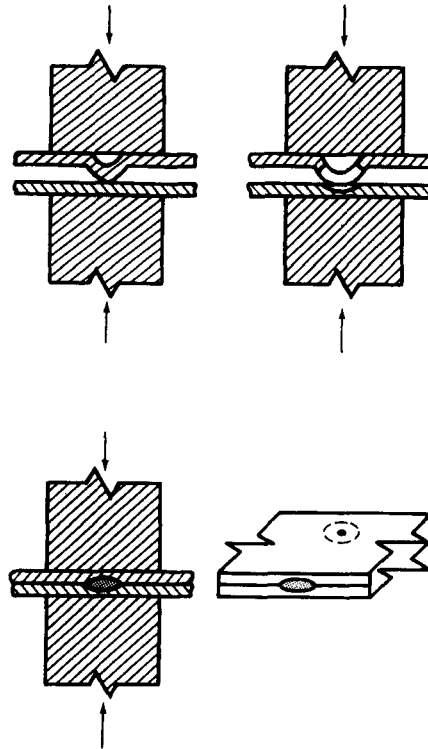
shows simple schematics comparing the three major resistance welding processes: spot, seam, and projection.
